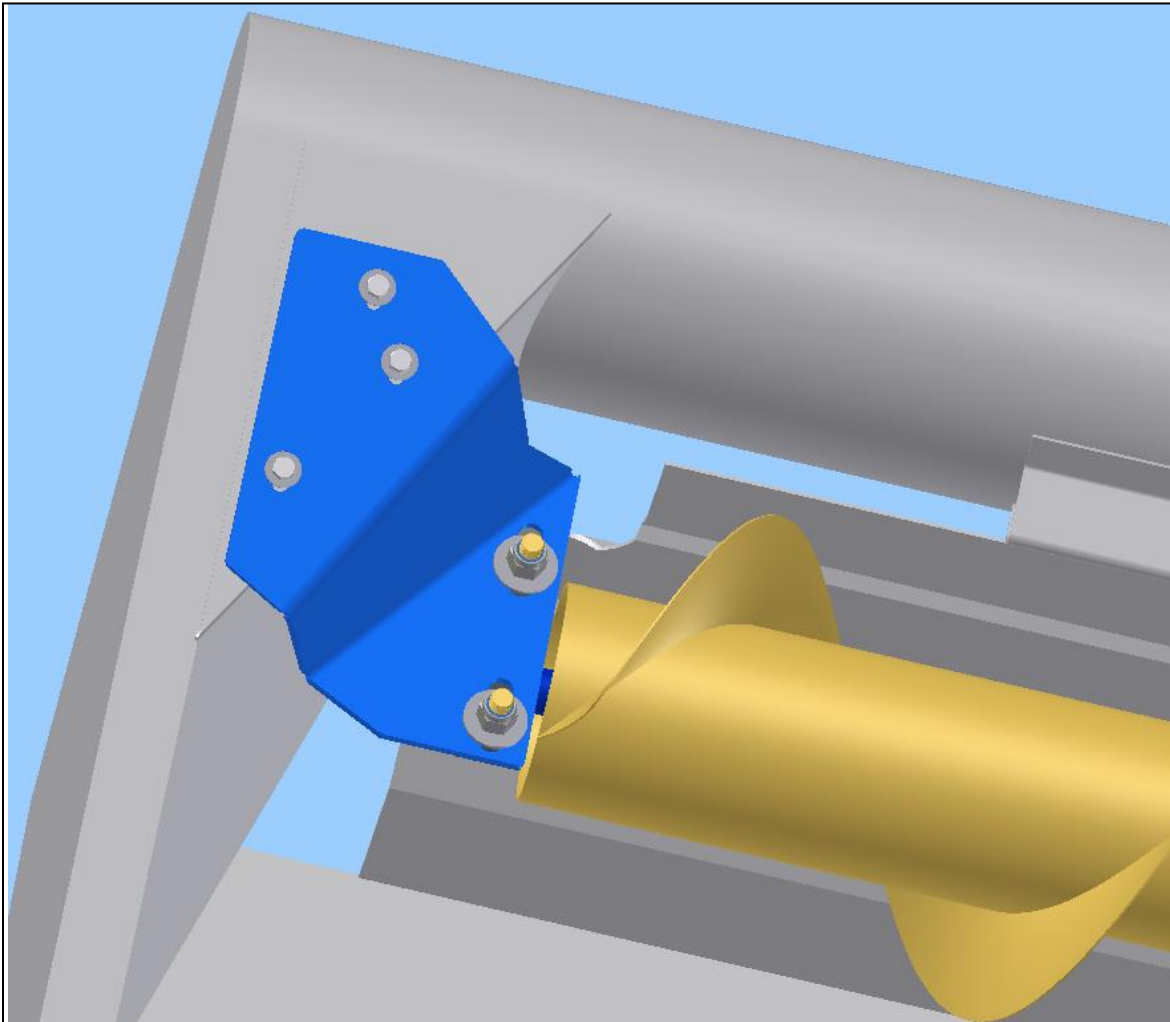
RIGHT END MOUNT MACDON 35-45 FT FD70 HEADER KIT'S # 405868, 405869, 4058725
